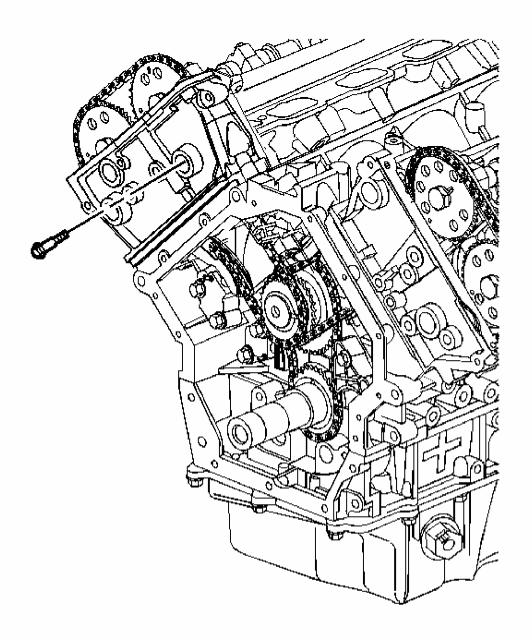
View Of Upper Right Secondary Camshaft Drive Chain Guide Bolt Courtesy of GENERAL MOTORS CORP.
